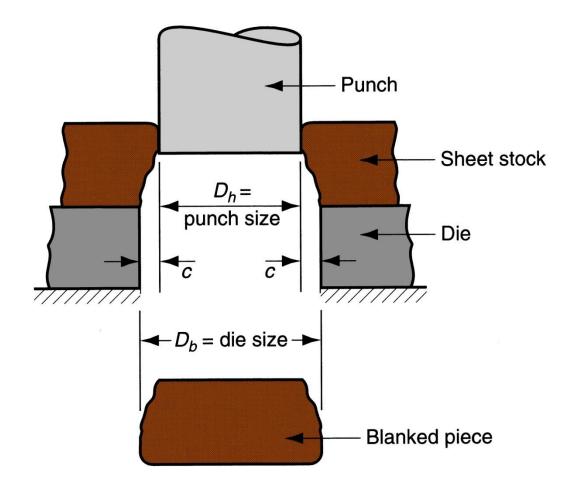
Die size determines blank size D_b ; punch size determines hole size D_h ; c = clearance
